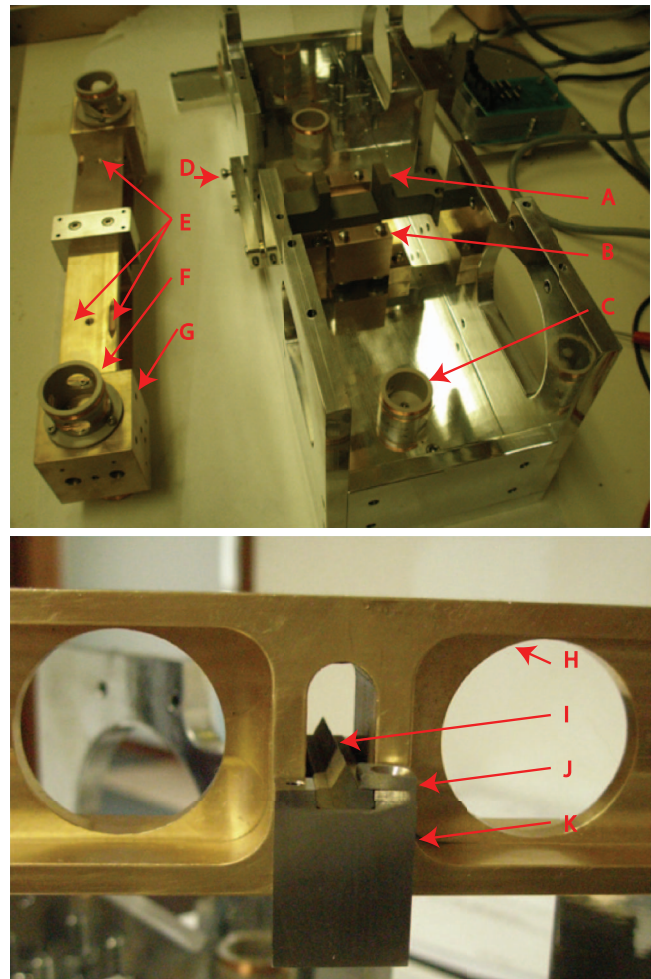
Beam and case during final assembly (top), and close up of knife edge being clamped to the beam (bottom). A: Tungsten Carbide anvil surface, B: four-pin lifting mechanism block, C: lower (static) actuator coil, D: lifting mechanism arm, E: cone-slot-flat kinematic beam positioning, F: LVDT Driver coil, G: head mass, H: beam, I: Tungsten Carbide knife-edge, J: knife-edge clamp (one of four being mounted), K: knife edge bridge.
